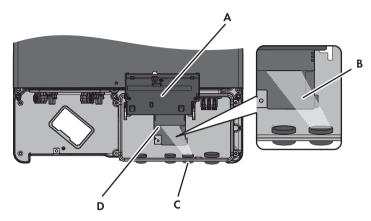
Mounting position and cable route in the inverter with the lower enclosure lid open and the display flipped up
